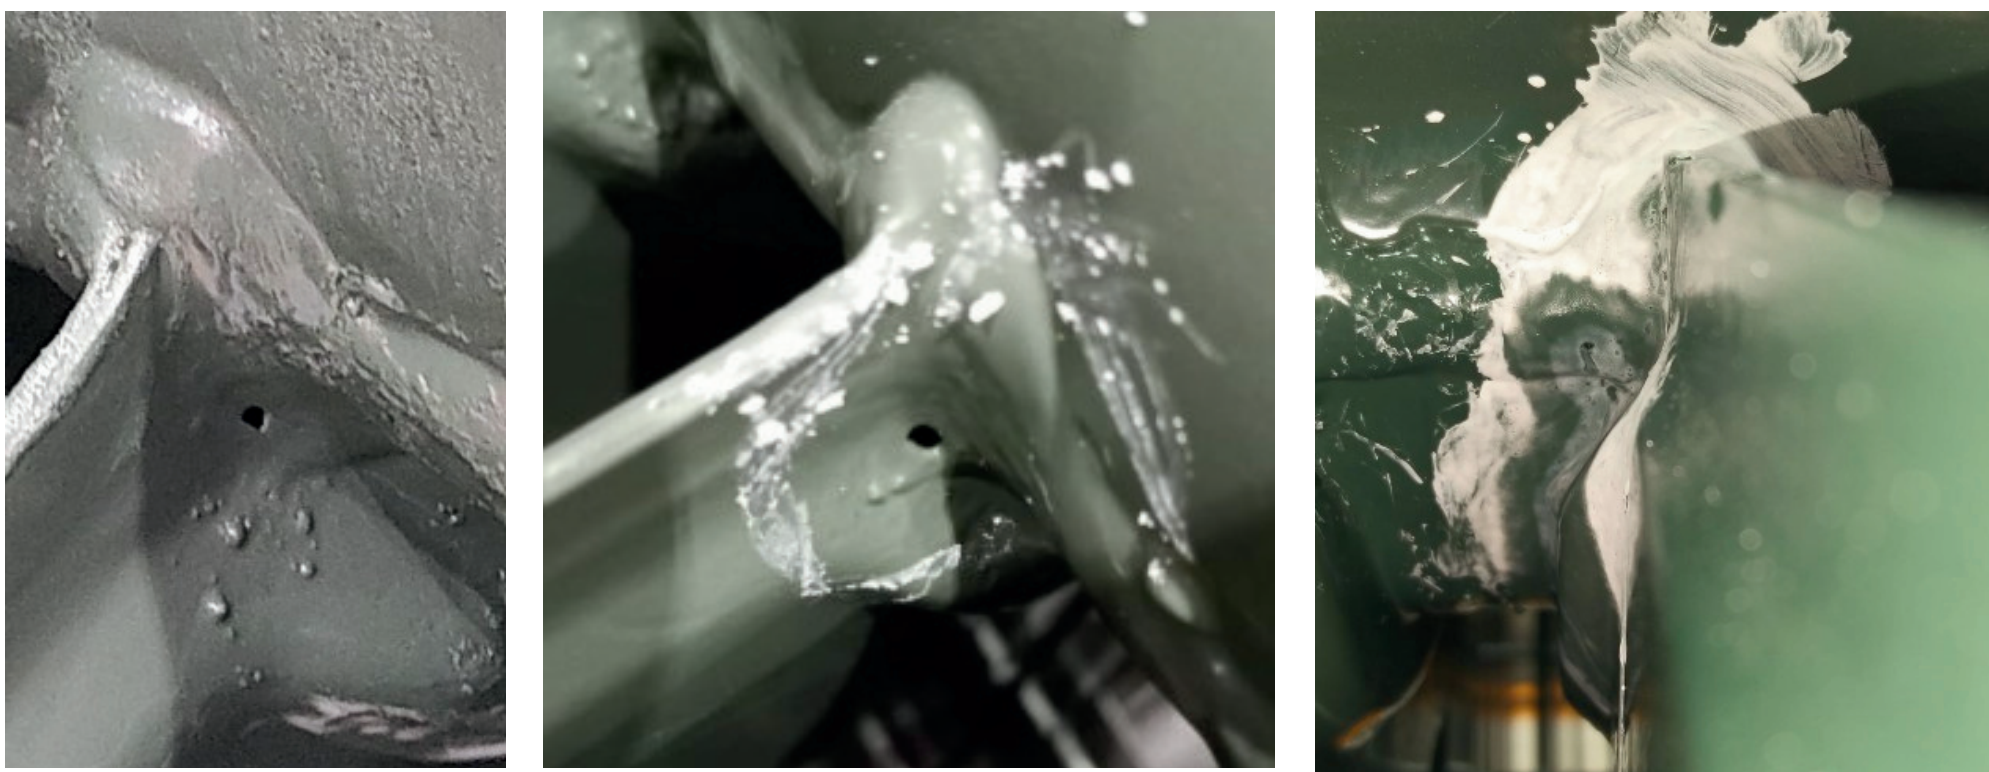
GMAW Welding Tube / Sheet Steel
